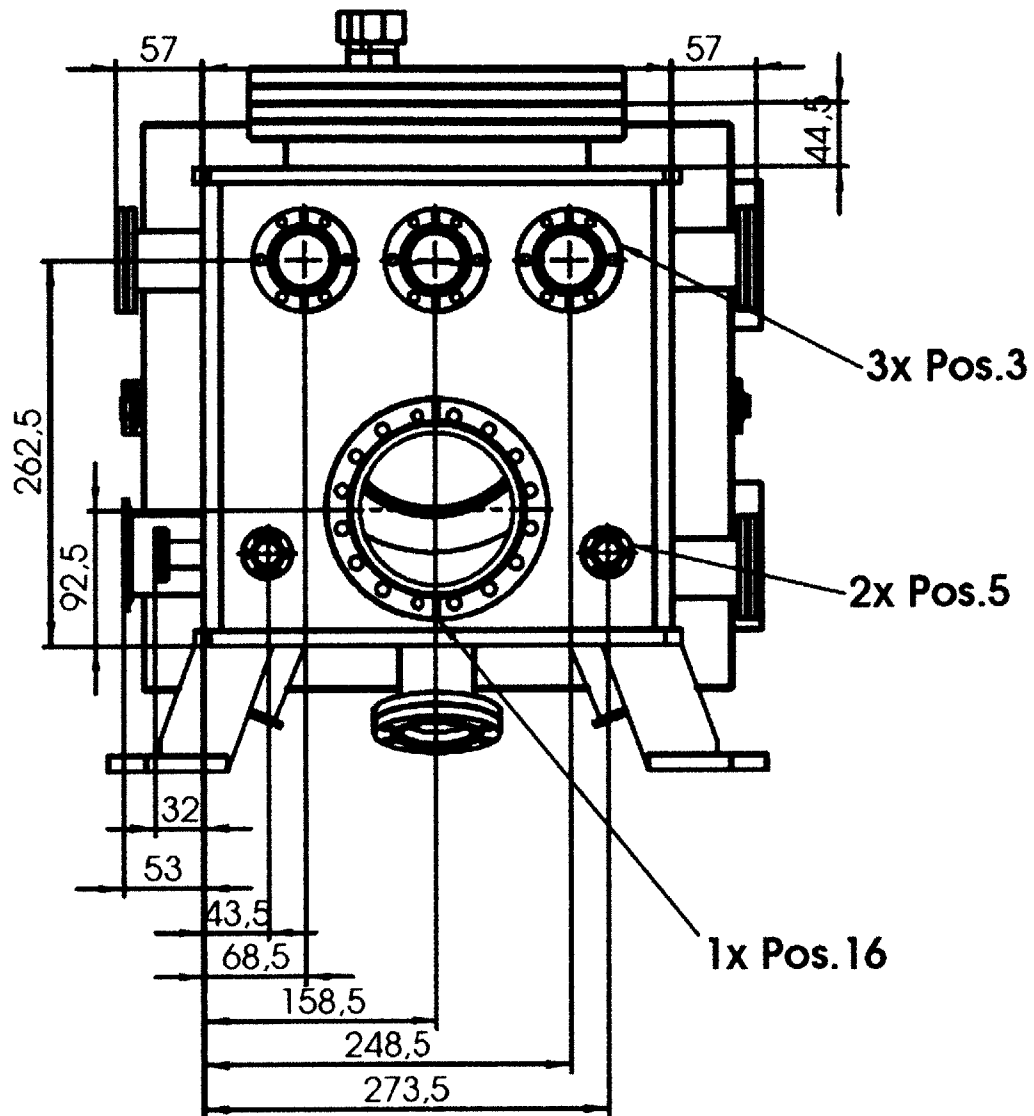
oCVD chamber engineering drawings – close-up view of back side of chamber
